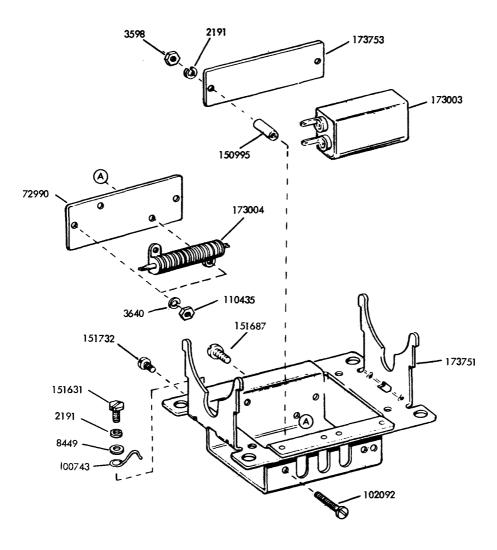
SERIES MOTOR MOUNTING PARTS
